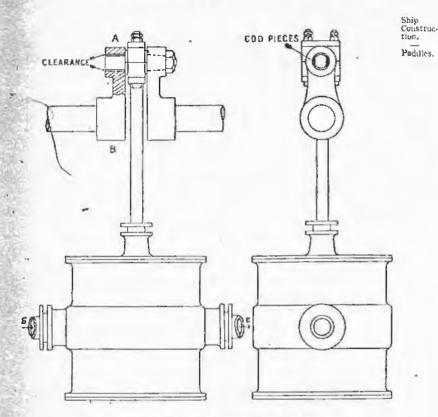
Crank Shaft for Oscillating Paddle Steamer.
